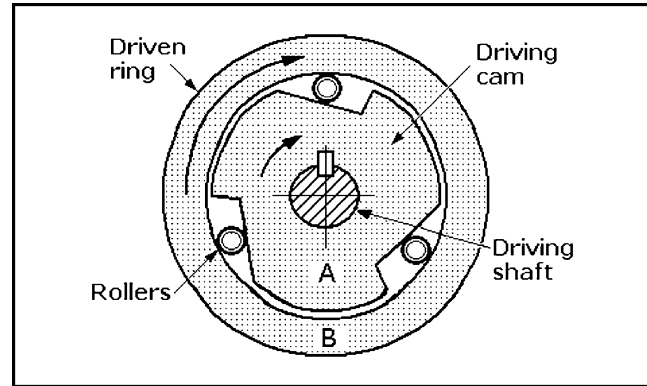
Overrunning clutch: As driving cam A revolves clockwise, the rollers in the wedge-shaped gaps between cam A and outer ring B are forced by friction into those wedges and are held there; this locks ring B to cam A and drives it clockwise. However, if ring B is turned counterclockwise, or is made to revolve clockwise faster than cam A, the rollers are freed by friction, the clutch slips, and no torque is transmitted.
